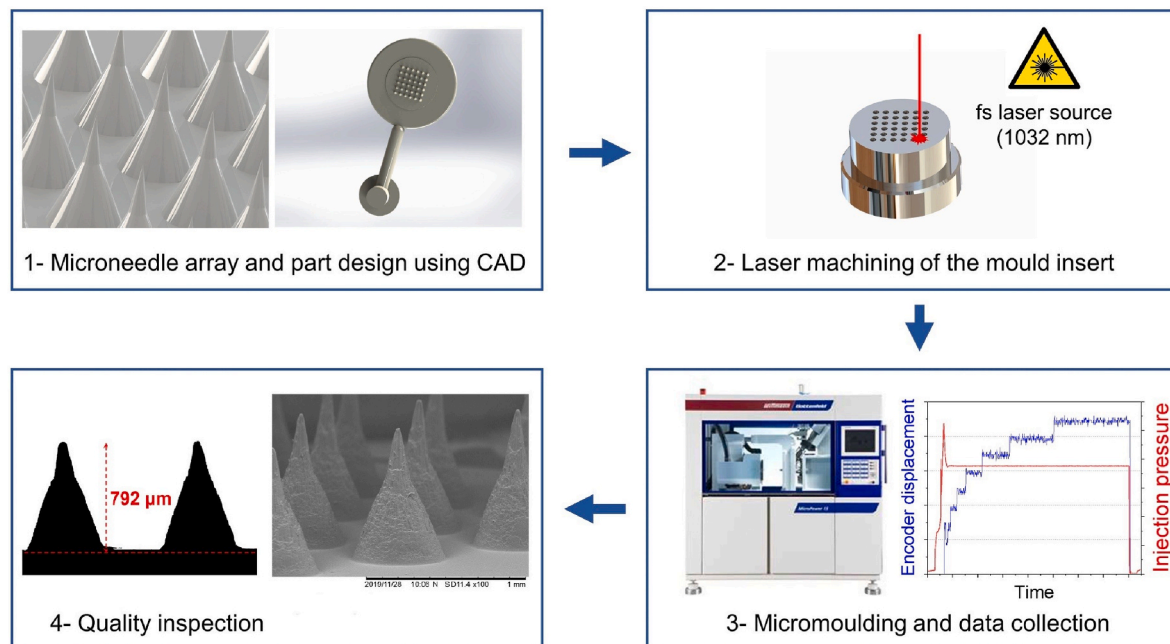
Manufacturing process chain of polymeric microneedles through injection moulding method, 1) microneedle array and part design, 2) laser micromachining of negative metal mould, 3) fabrication of microneedles using microinjection moulding machine, 4) quality assessment of micro-injected microneedles. Adapted with permission from Ref. [16], Copyright 2021, Elsevier.
